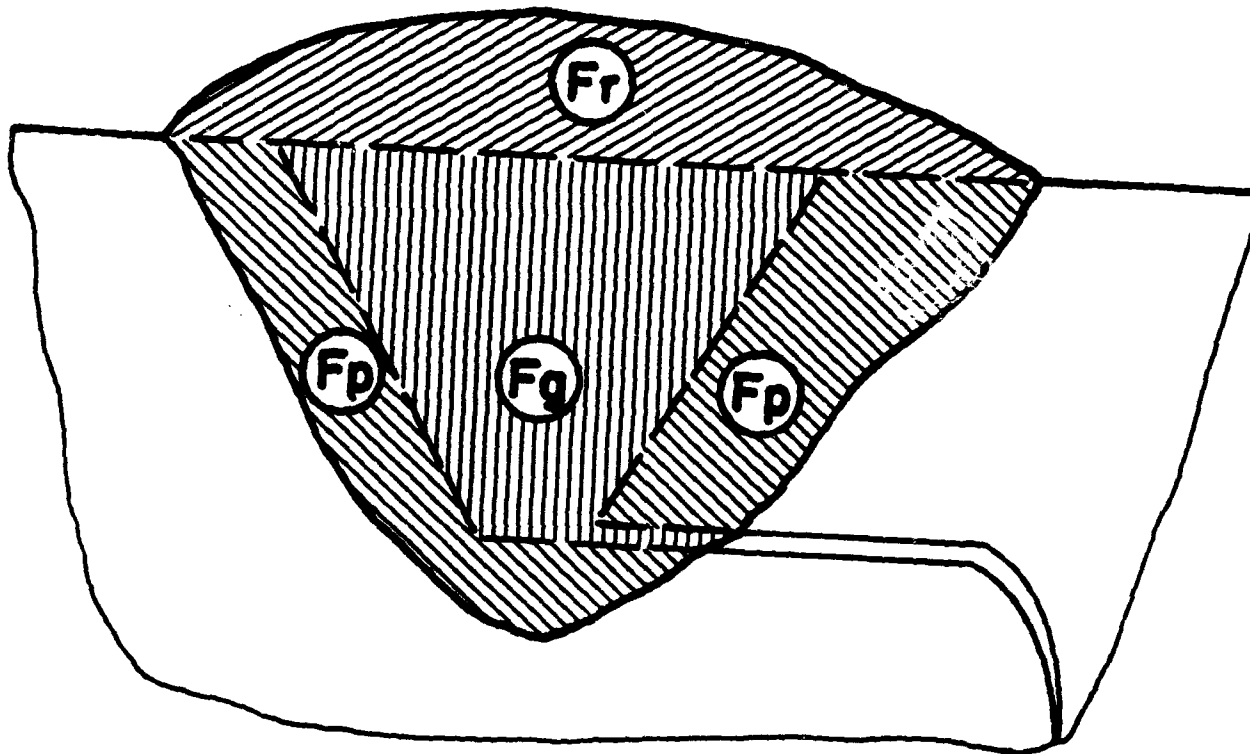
Cross-section areas of a welded joint:
